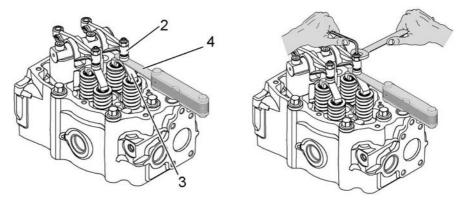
Check and adjust exhaust valve clearance of 0,40 mm - cold
